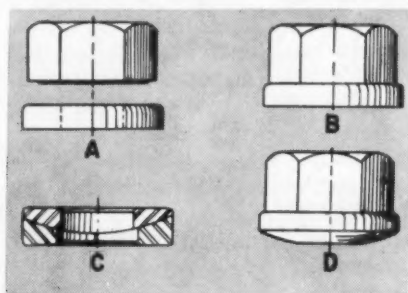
(A) Hex nut and washer which can be used as clamping media for swinging bolts; (B) collared nut with integral washer for use with swinging bolts; (C) spherical two-piece washer sometimes used to center swinging bolt; and (D) hex nut with integral collar used with lower half of spherical washer or in spherical socket machined in swinging arm.
